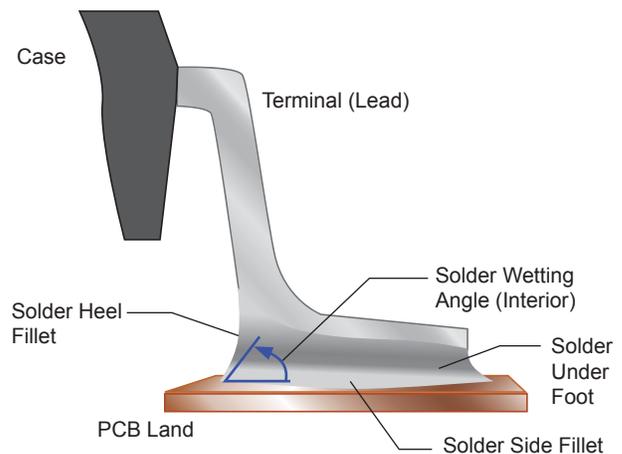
Gull Wing Solder Joint. Under optimum conditions, a smooth, concave fillet at the heel and sides can be observed. A solder layer between the terminal foot and the land is critical. A low wetting angle is expected between the edge of the solder and the terminal and land surfaces.
